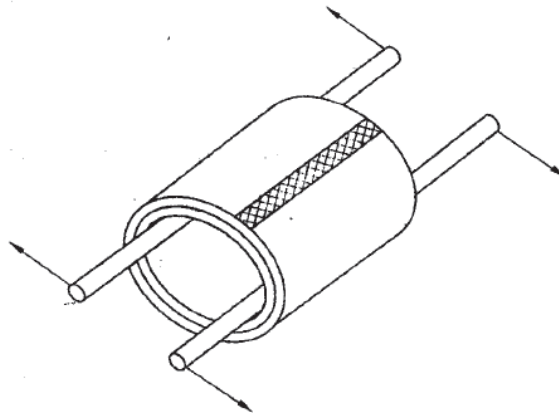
Schematic Presentation of the Pipe Ring Test Showing the Aluminium Weld at  $90^\circ$  to the Tensile Axis
